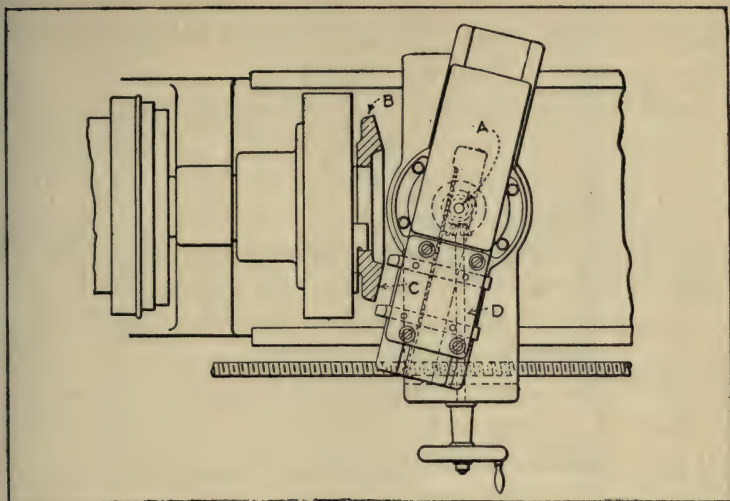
SPECIAL SWIVEL CROSS-SLIDE FOR A TURRET LATHE
